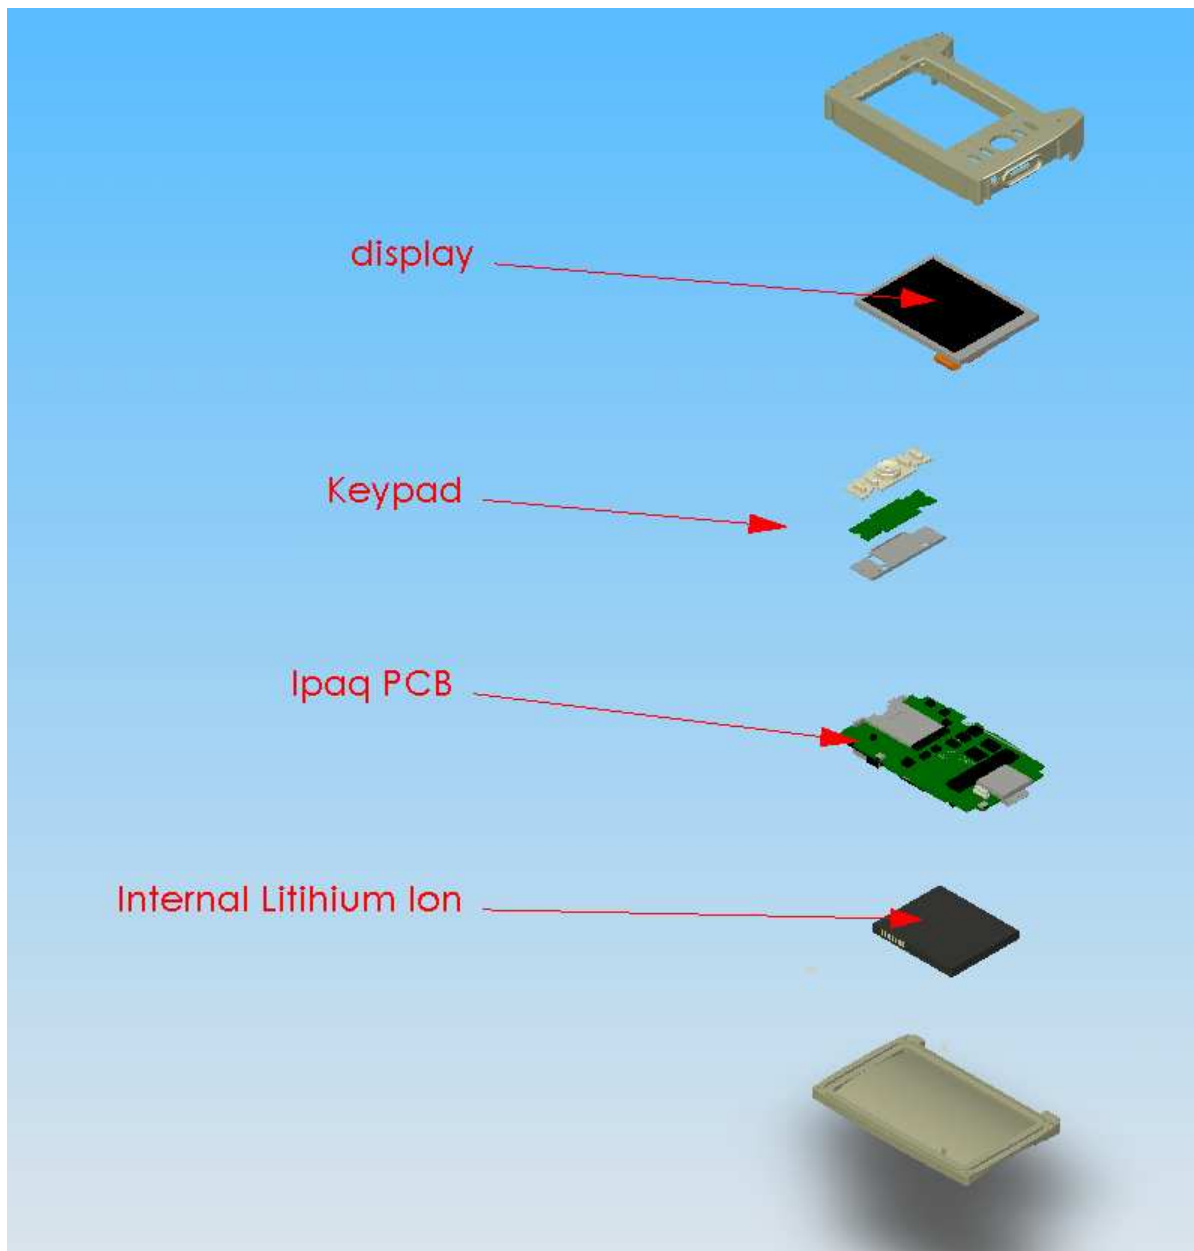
Internal circuit boards in exploded Spiral 3 diagram.
